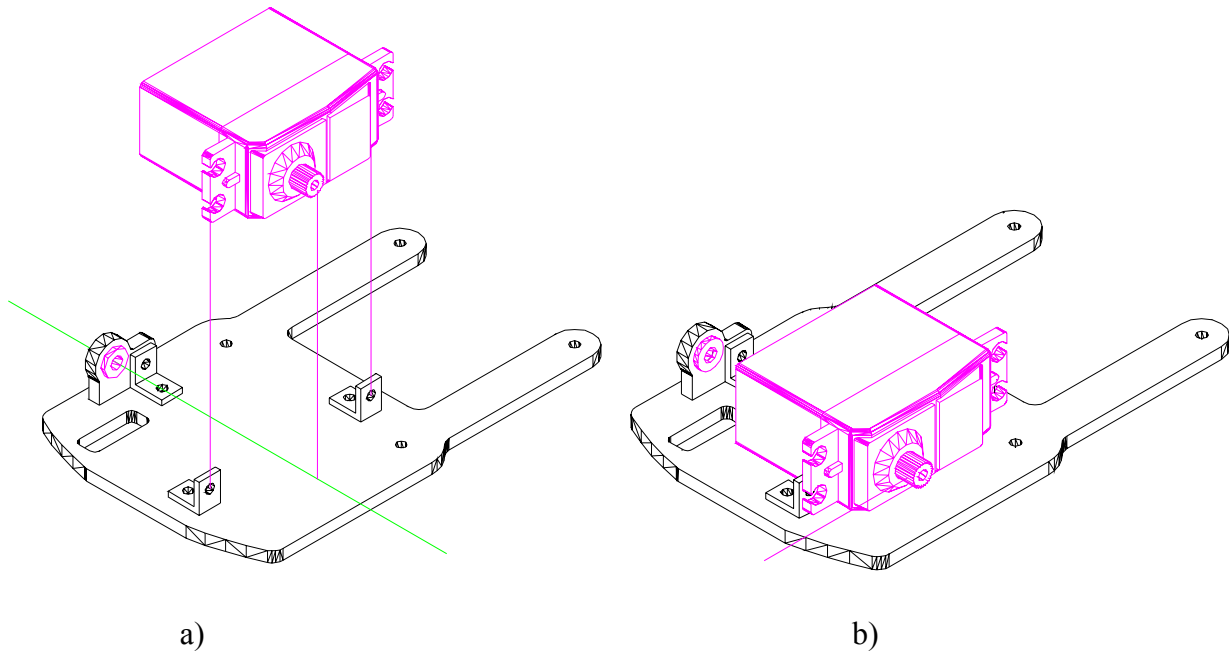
The shoulder servo fastens to the two angle brackets on the manipulator base plate a), resulting in the completed subassembly b).
